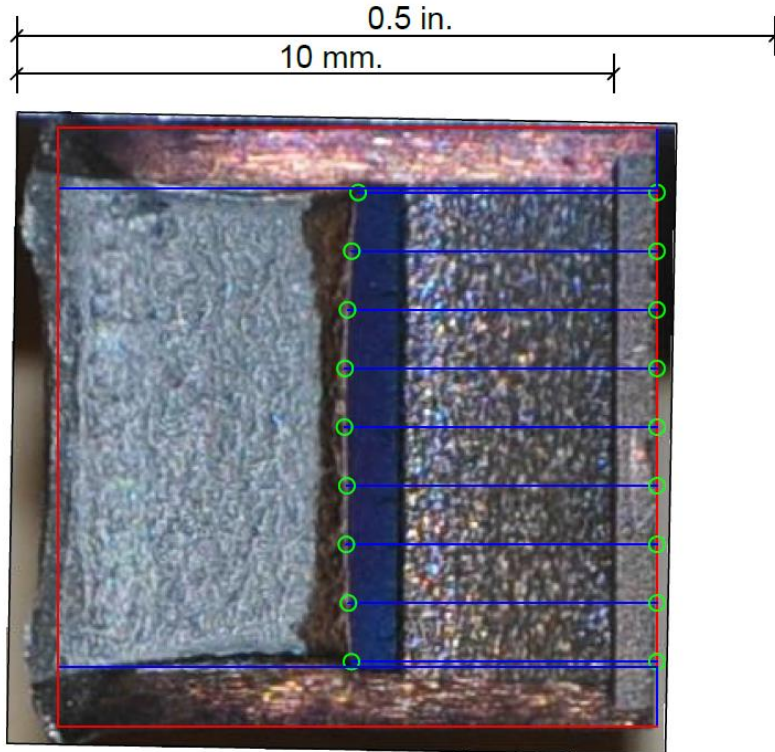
Specimen F17' Fracture Surface
